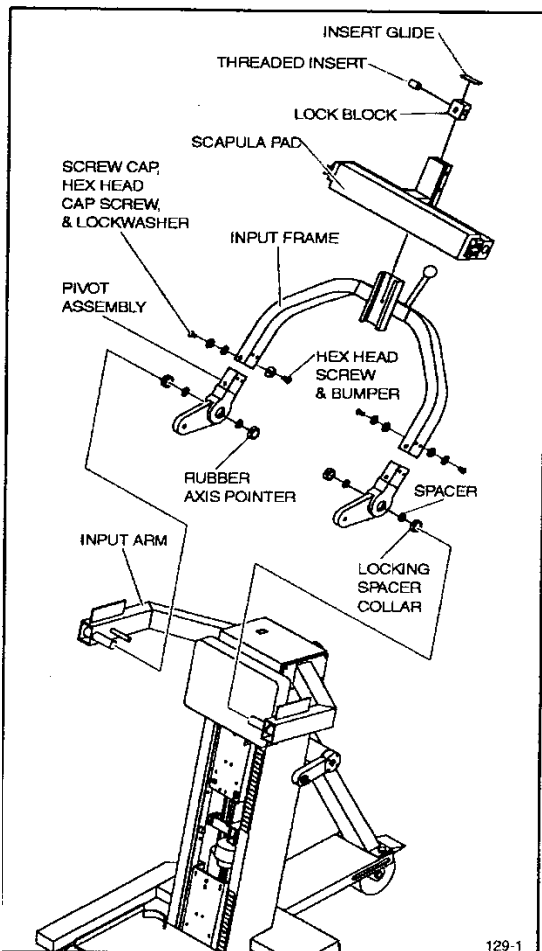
Scapula Pad, Input Frame and Pivot Assembly Replacement
